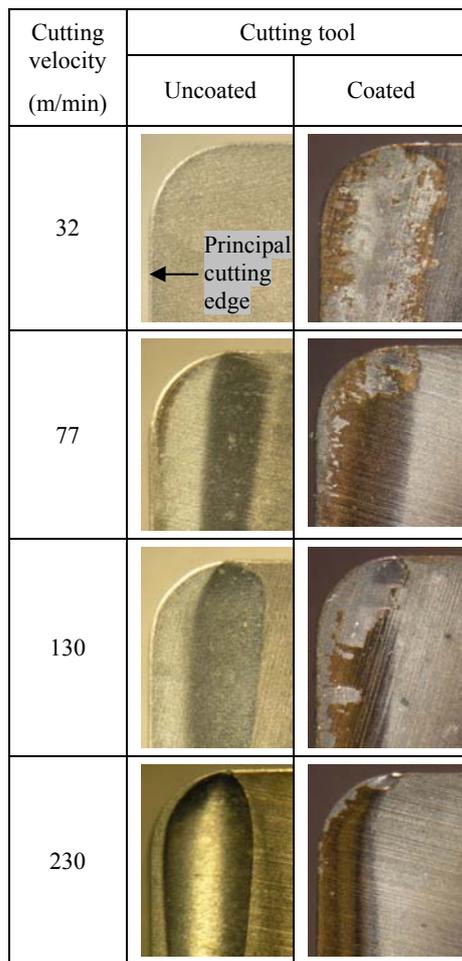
Optical microscopic images showing rake surfaces of uncoated and coated turning inserts after machining of steel with different cutting velocities
